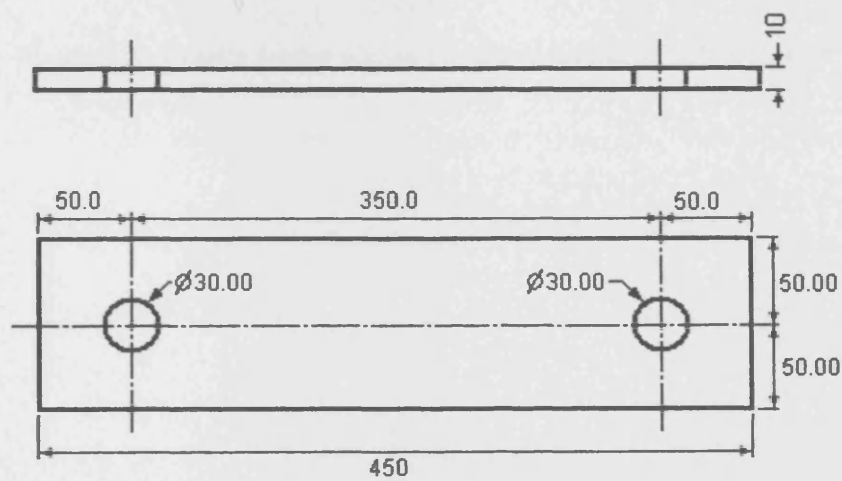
Dimensions of the specimens for fatigue precracking (units in mm).
